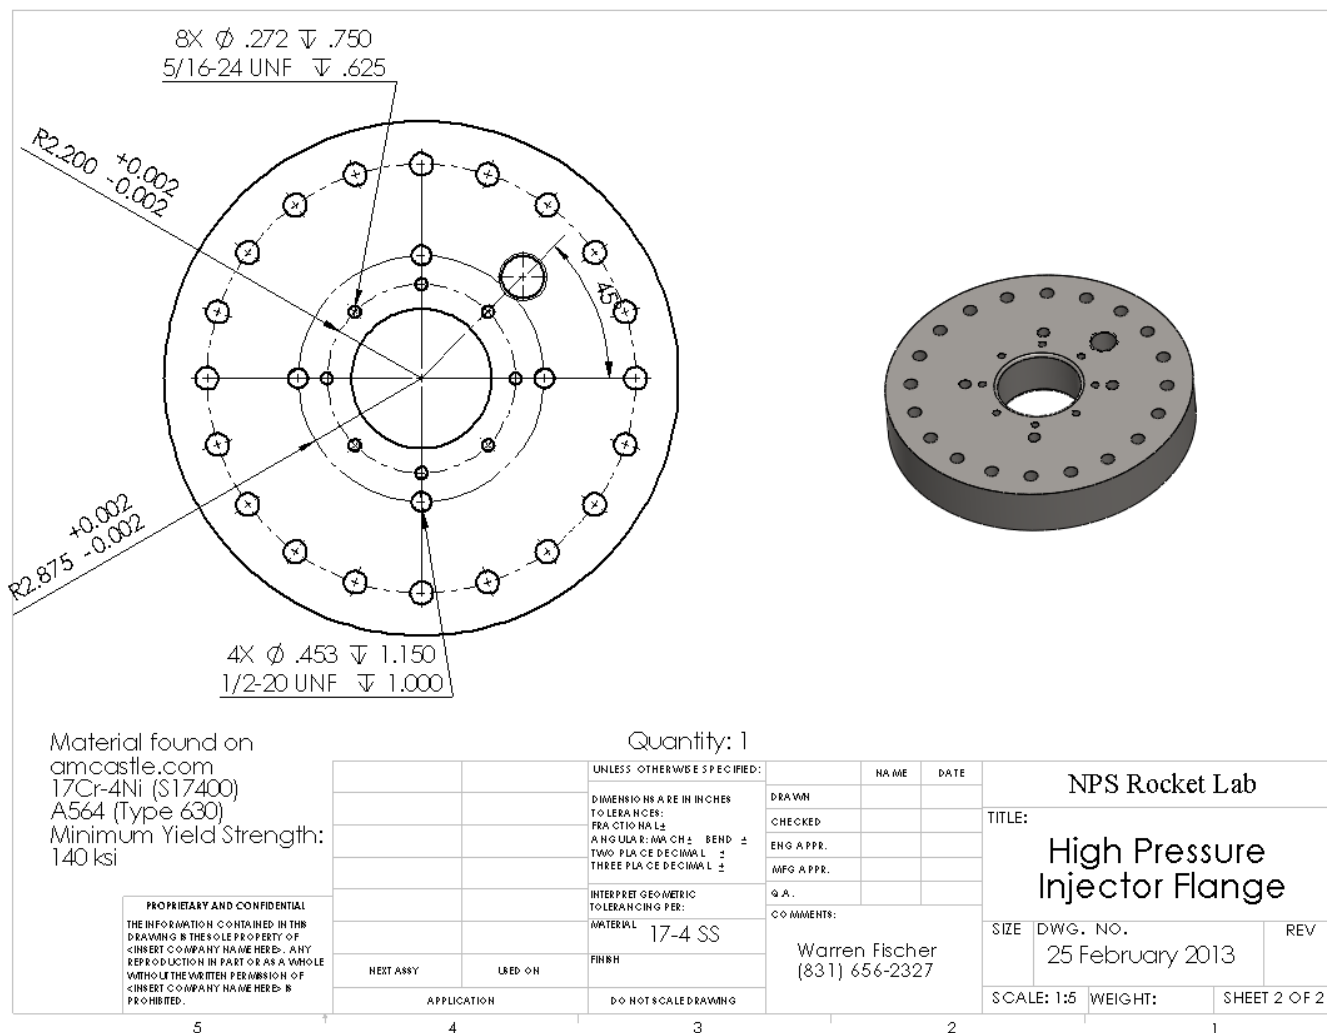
Injector Flange Fabrication Drawing (View 2 of 2)
